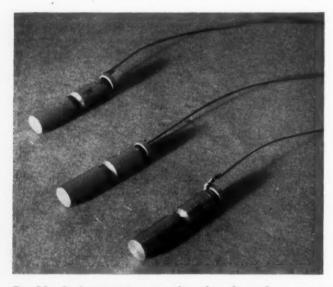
Carburizing test samples, cheaply made on screw machine and easily fractured, furnish an effective means of checking case depth
